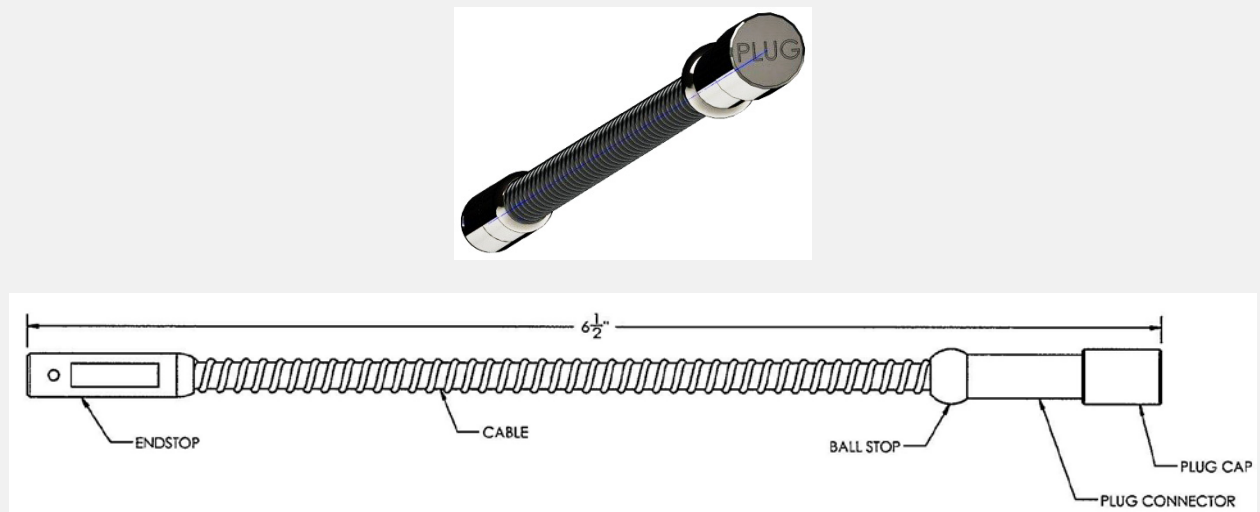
SHIPPING PLUG ASSEMBLY
